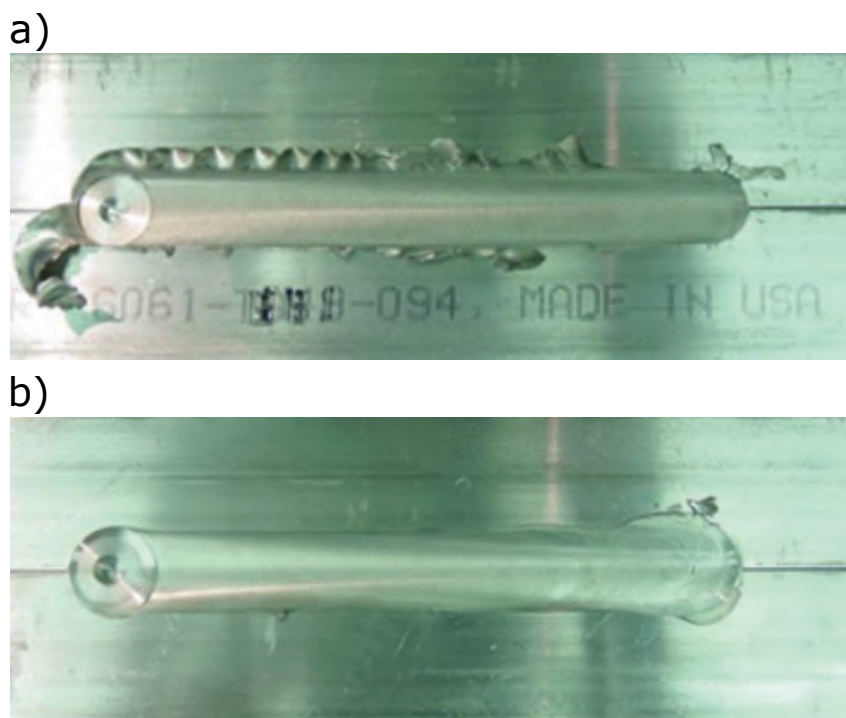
(a) FSW made via position control. Burrs are visible on the side of the weld and are the result of the intentional unevenness of the plate's surface, making the tool sink into the plate during welding. (b) FSW made via force control . Contrary to the position controlled weld on (a), this weld does not have burrs on the side of the welded joint [53].
